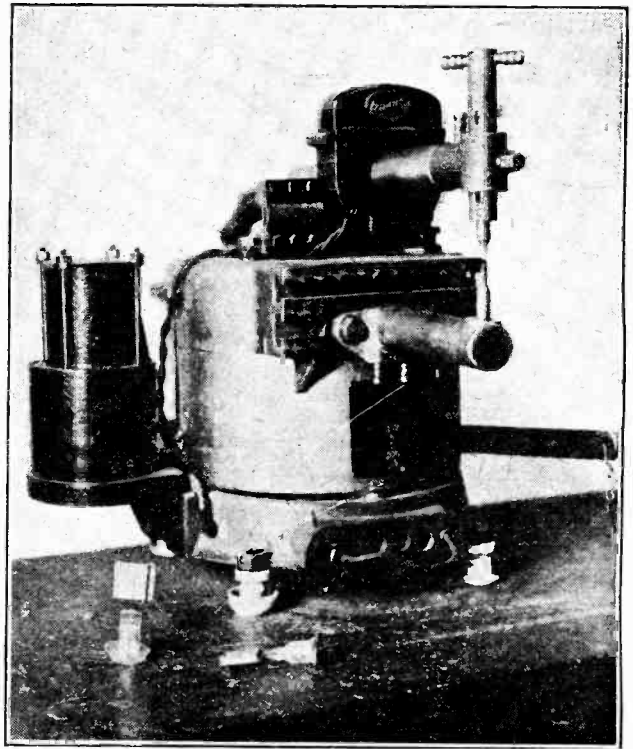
Electric welding machine for fixing anodes and grids to their supports.
